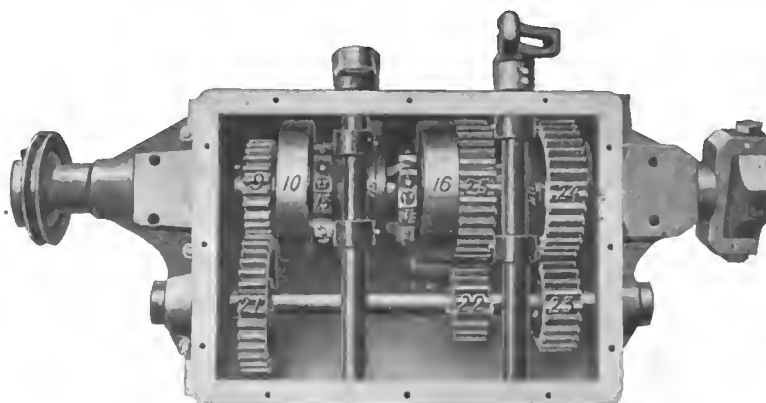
CHANGE-SPEED GEAR BOX WITH COVER REMOVED.
